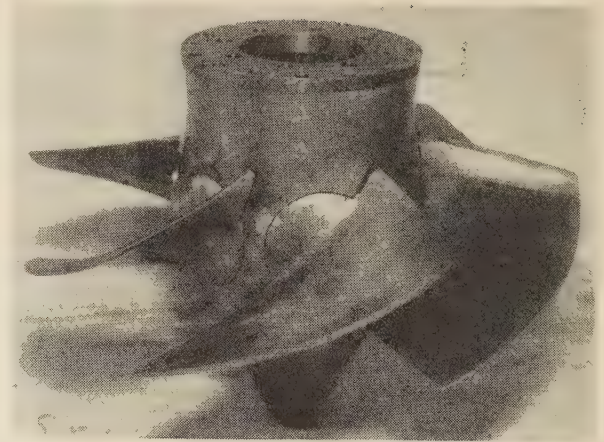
RUNNER MODEL WITH SIX BLADES; 16 1/2-IN. SIZE
